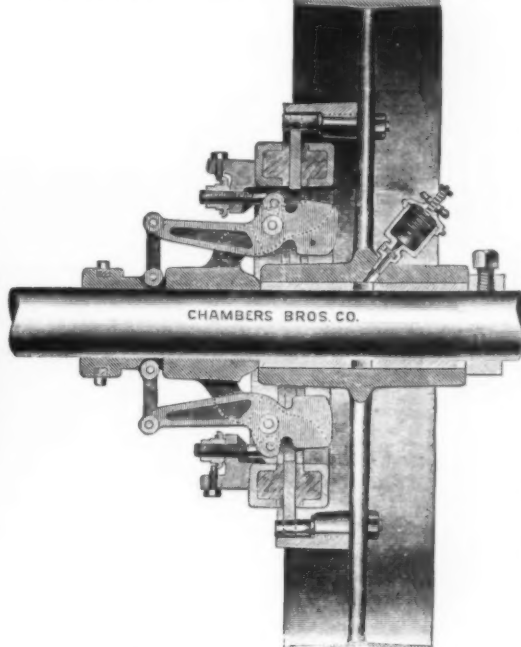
FLEXIBLE FRICTION CLUTCH—SECTIONAL VIEW.
